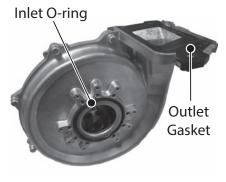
Install inlet O-ring and outlet gasket to new fan assembly
